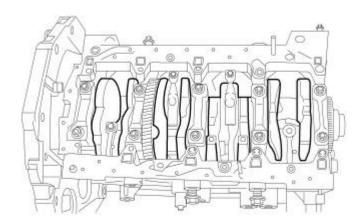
CRANKSHAFT Courtesy of CHRYSLER LLC
